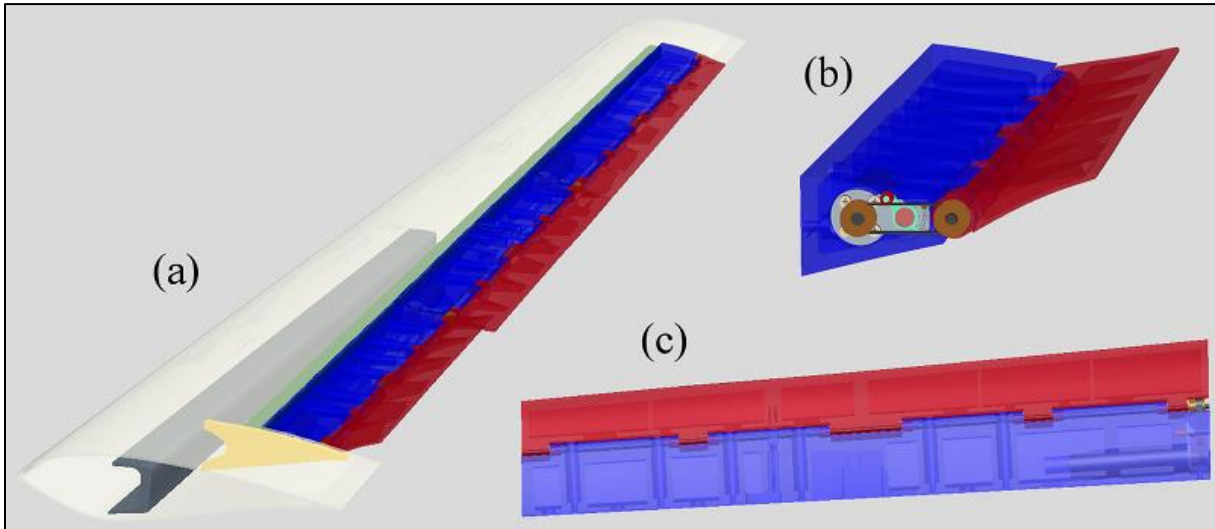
Flap module design overview: (a) Three modules assembled with the blade tip. (b) A single module with flap actuated a few degrees. (c) Top view showing the flap hinge geometry.
